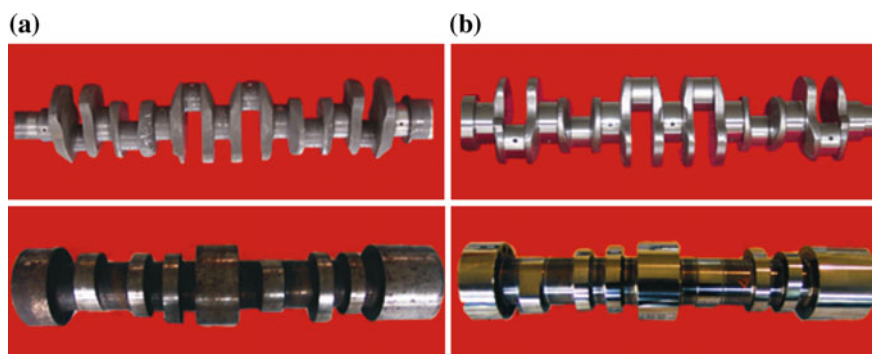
Comparison photographs of certain camshaft and crankshaft. a Before finishing; b after finishing
